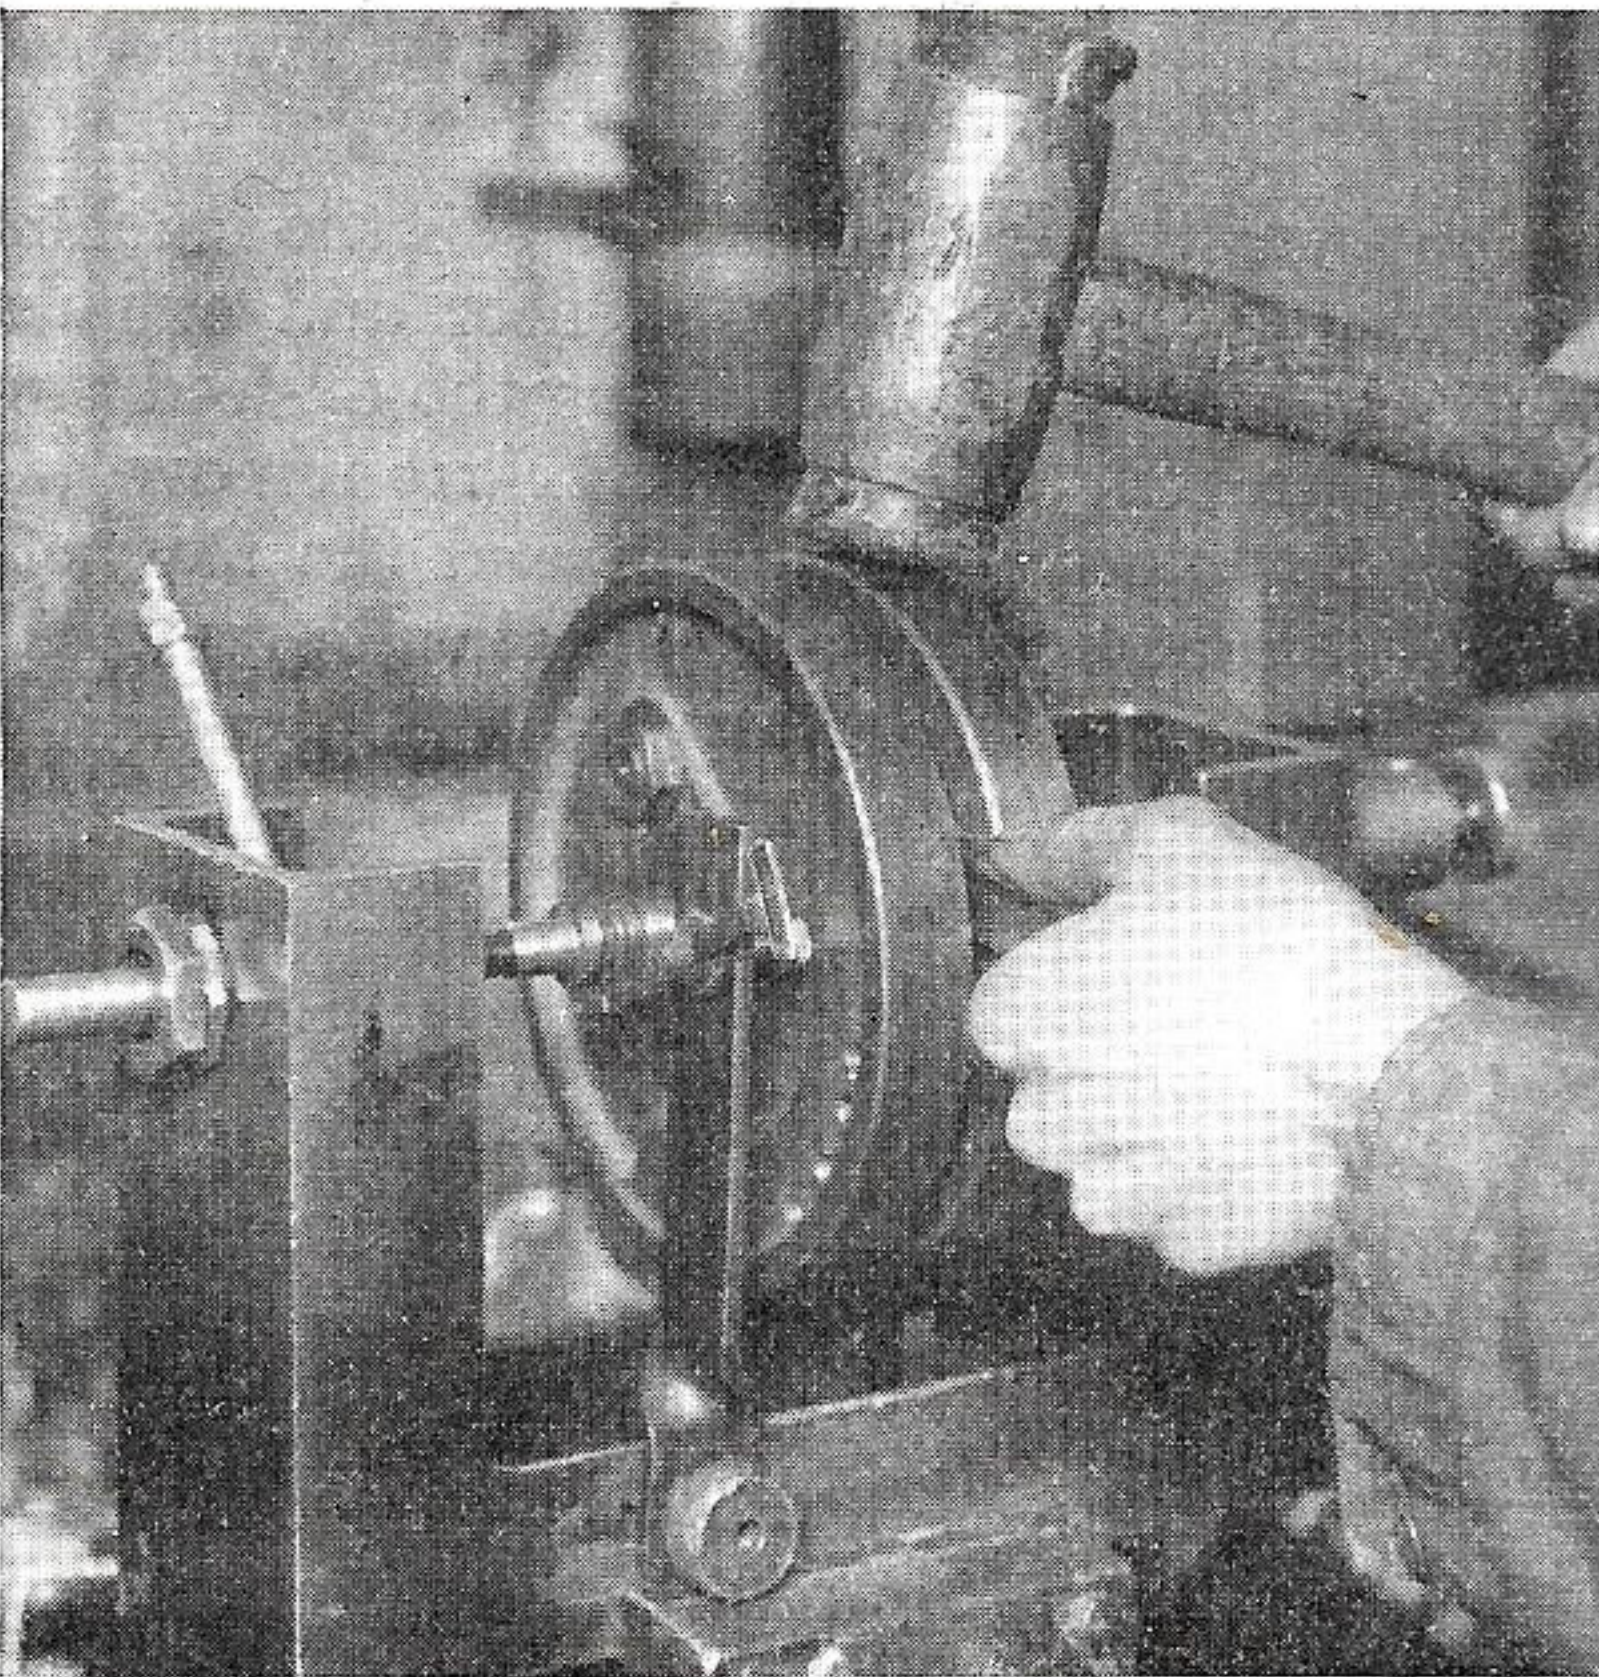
SHOWING THE POSITION OF THE KEYWAY IN THE CRANKSHAFT.
